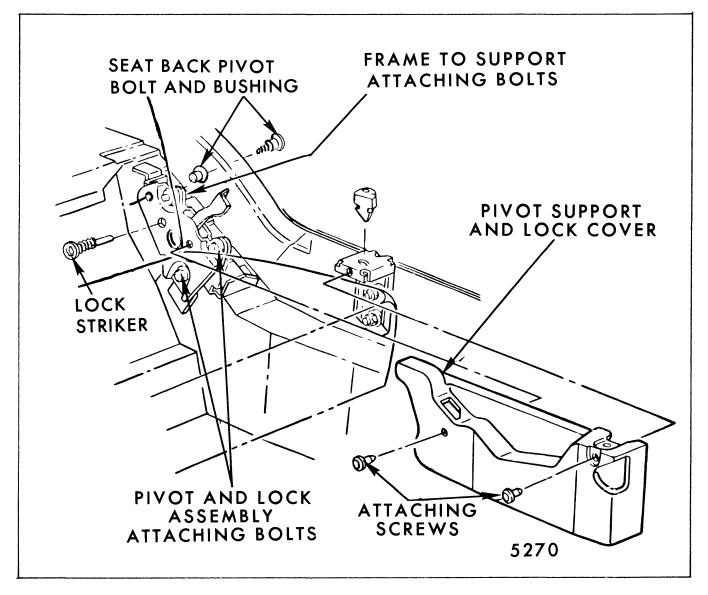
Folding Third Seat Back Pivot and Lock Support Assembly - "A" Body Three-Seat Styles
